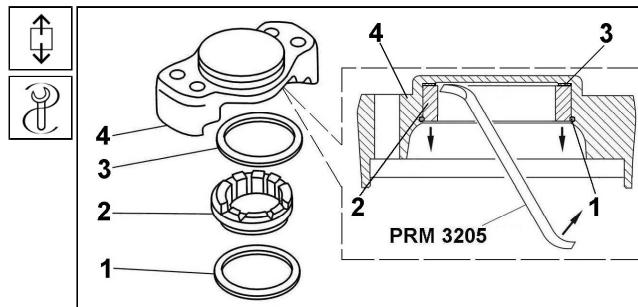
Fit of the bearing in the upper steering bearing housing
